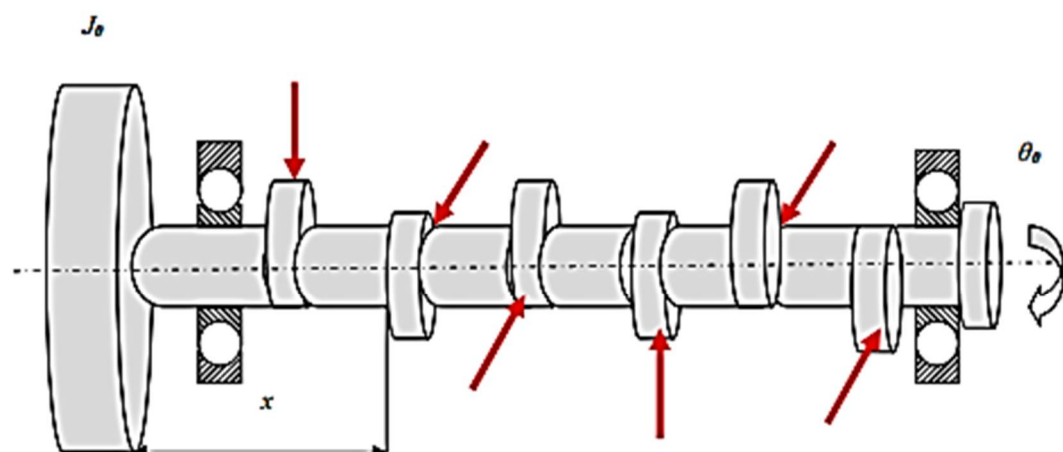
Camshaft with a flywheel on bearing supports The equation of the angles of the torsion sections of the shaft has the form
